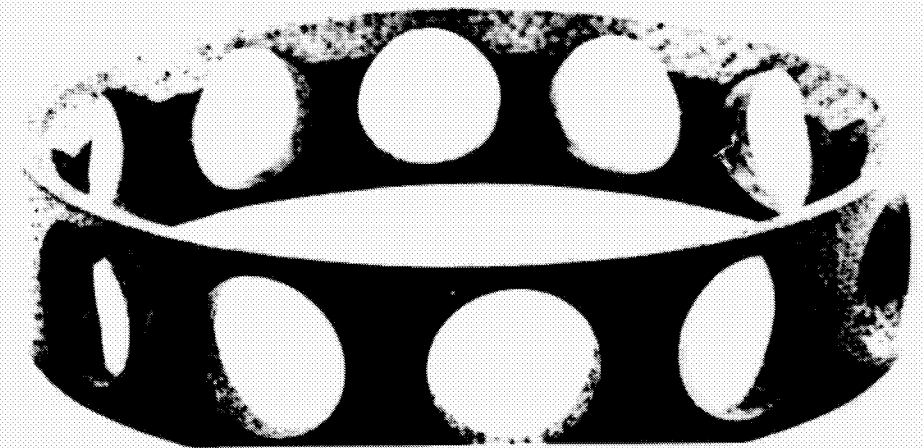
Pretest Appearance of Irradiated PBI-Glass Ball Retainer S/N 880028, Outside Surface
